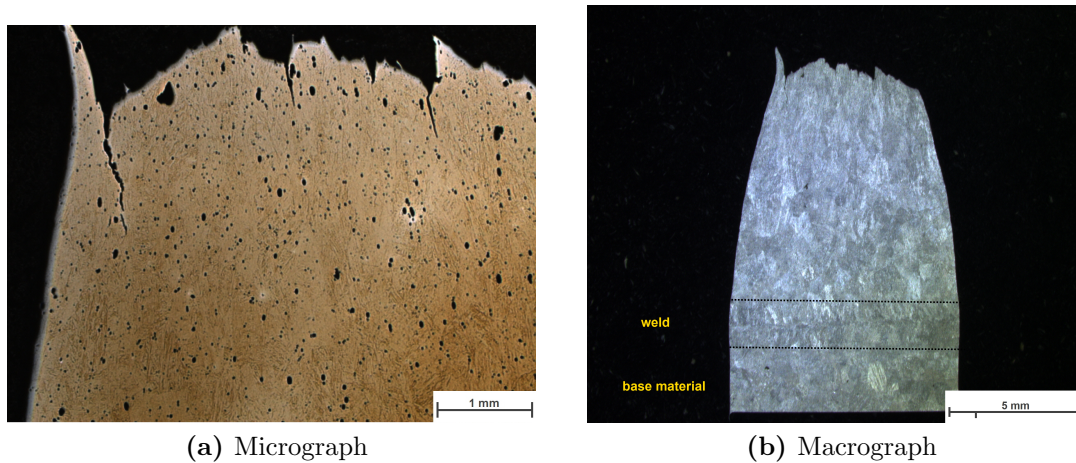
(a) Longitudinal cut of tensile sample fracture location etched with mod. LB and Adler. The crack development along pores is clearly visible. (b) The etching did not give a good contrast between weld seam and base material, therefore the welded area is framed by dashed lines.
